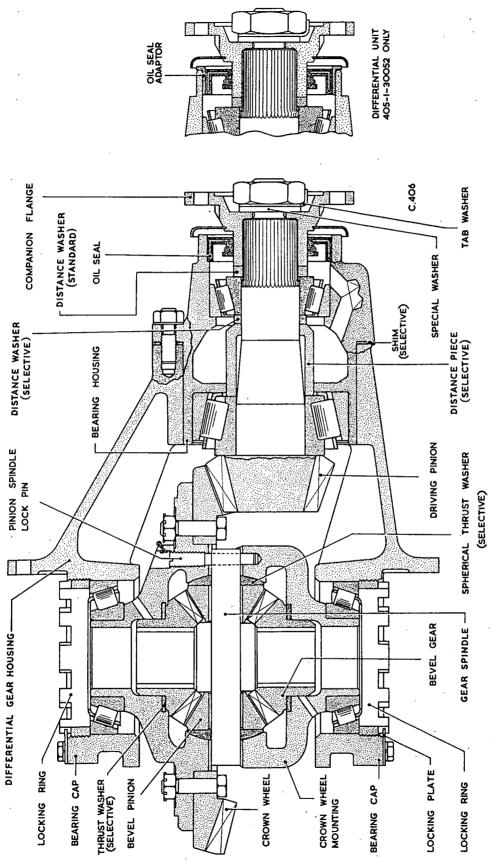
Assembly of differential unit (Detachable bearing housing)
